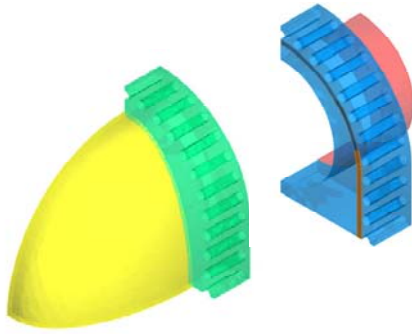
Quarter-symmetry view of the return bonnet flange assembly (exploded)
